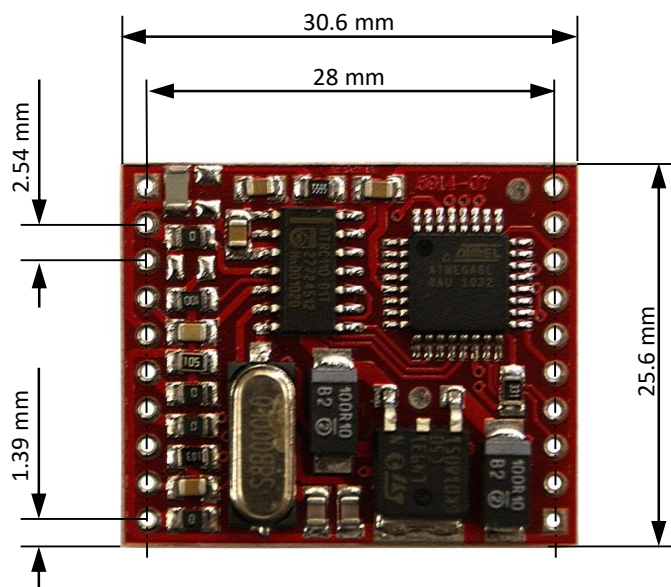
Dimensional Drawing of OEM Module, view onto upper side with RFID reader IC
